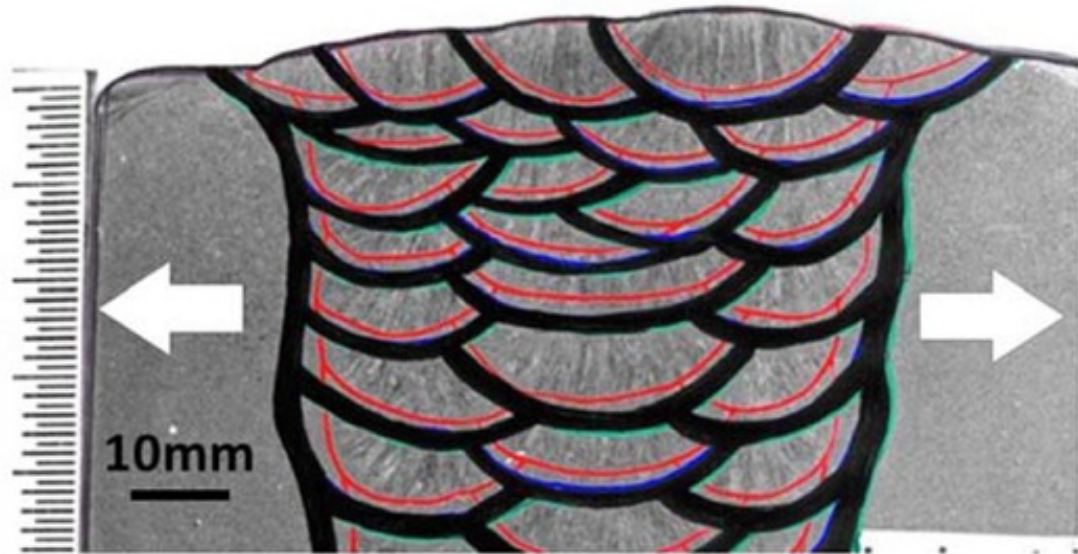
Macrostructural overview of section of a multi-pass weldment between two alloys. Each of the areas separated by black lines is a single weld pass [65].
